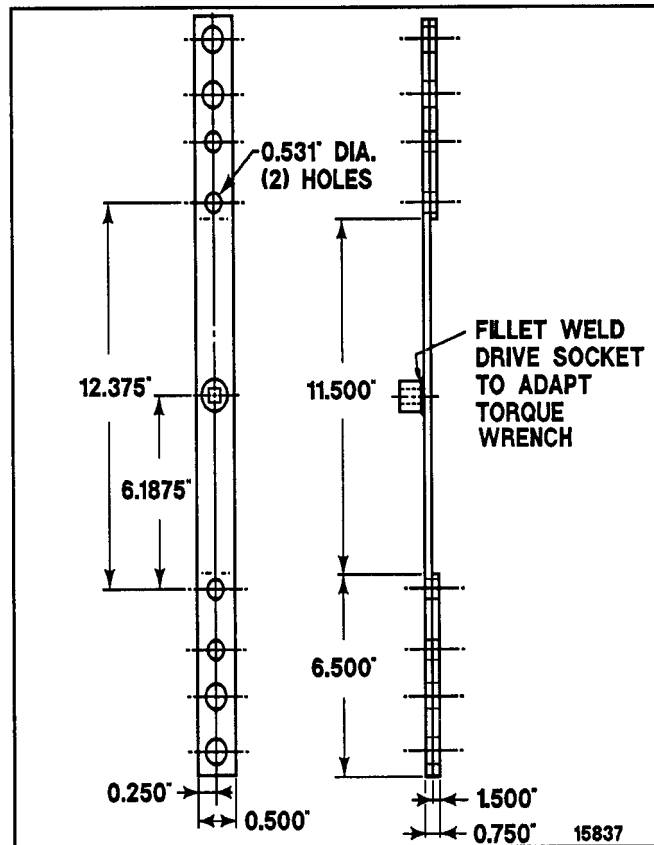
MANUFACTURING DETAILS FOR ADAPTOR BAR
